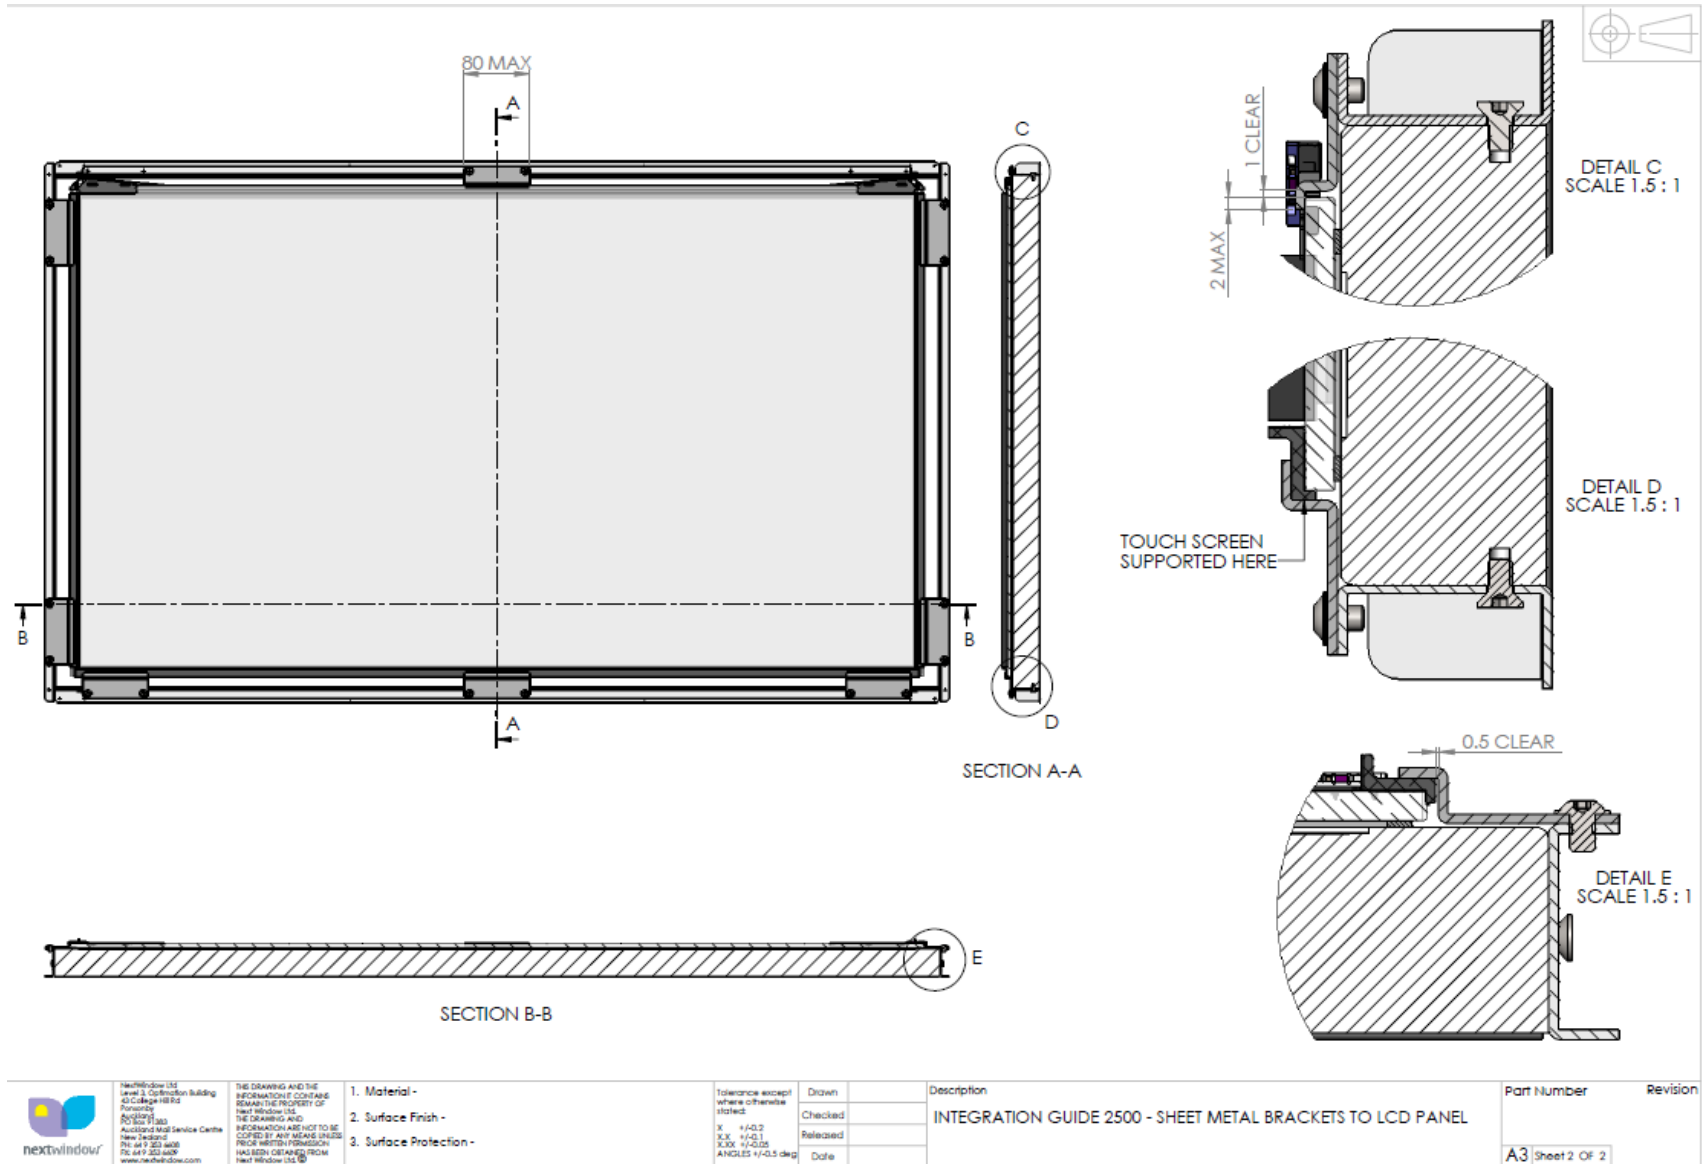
Detailed cross section view showing mounting with brackets to Display Panel
